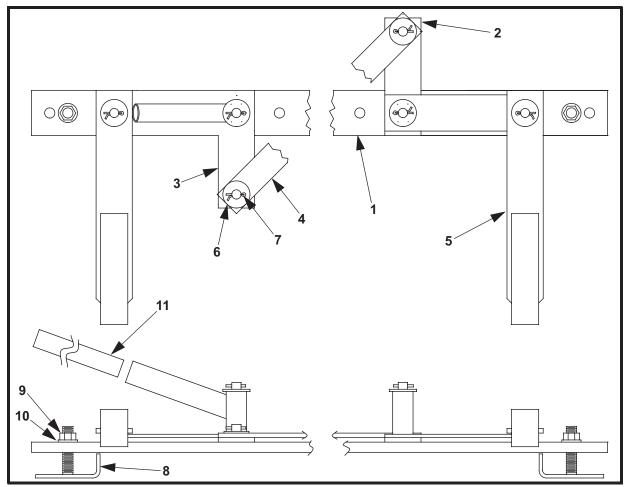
Manual Aligner Assembly, P/N 17326-X
